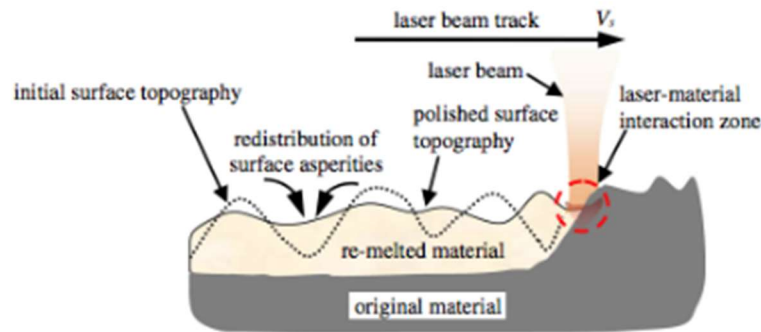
Schematic showing the surface profile of a workpiece during laser polishing (Reprinted from [20])
